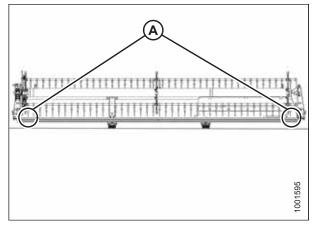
Measurement Locations for Single and Double Reels – Single Reel Shown
